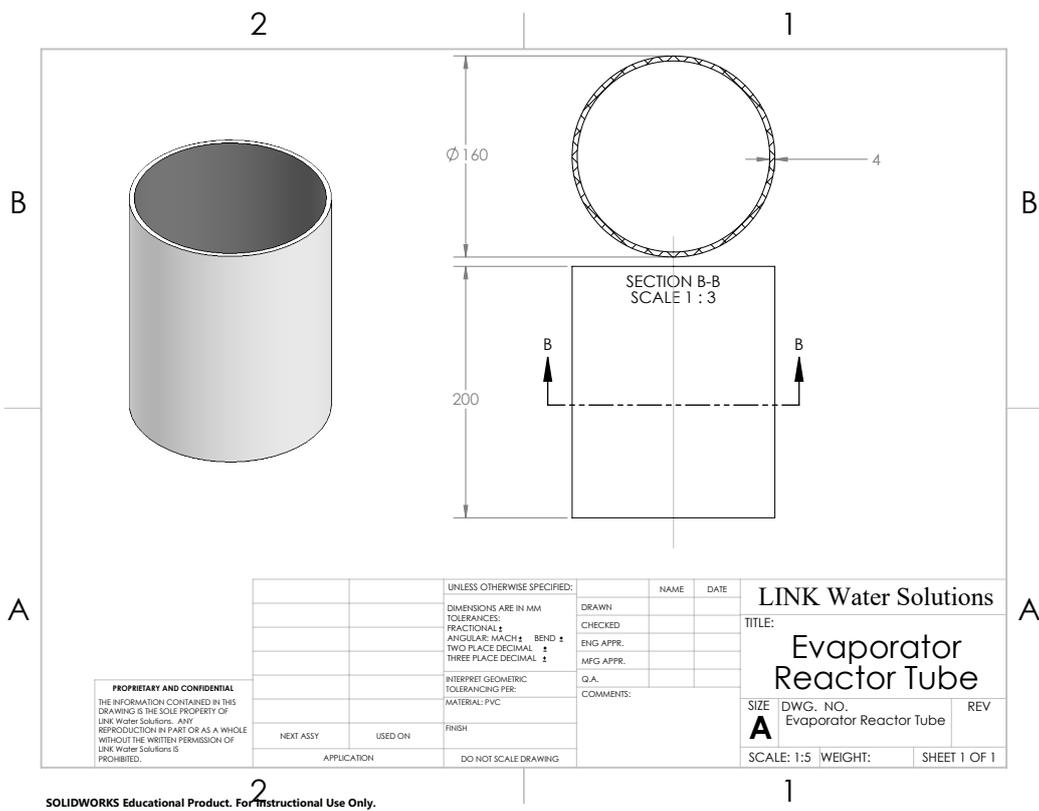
Technical drawing of tube vessel of the evaporator or condenser
